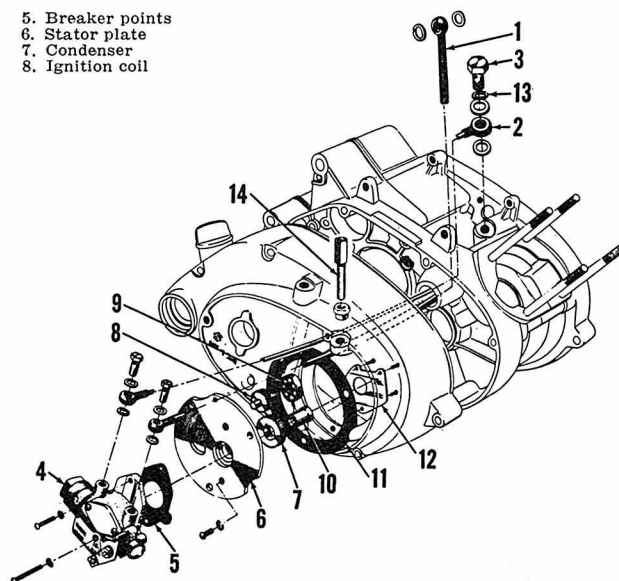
Exploded view of the ignition and electrical system flywheel assembly. Ignition coil (8) is located inside frame under the fuel tank.
